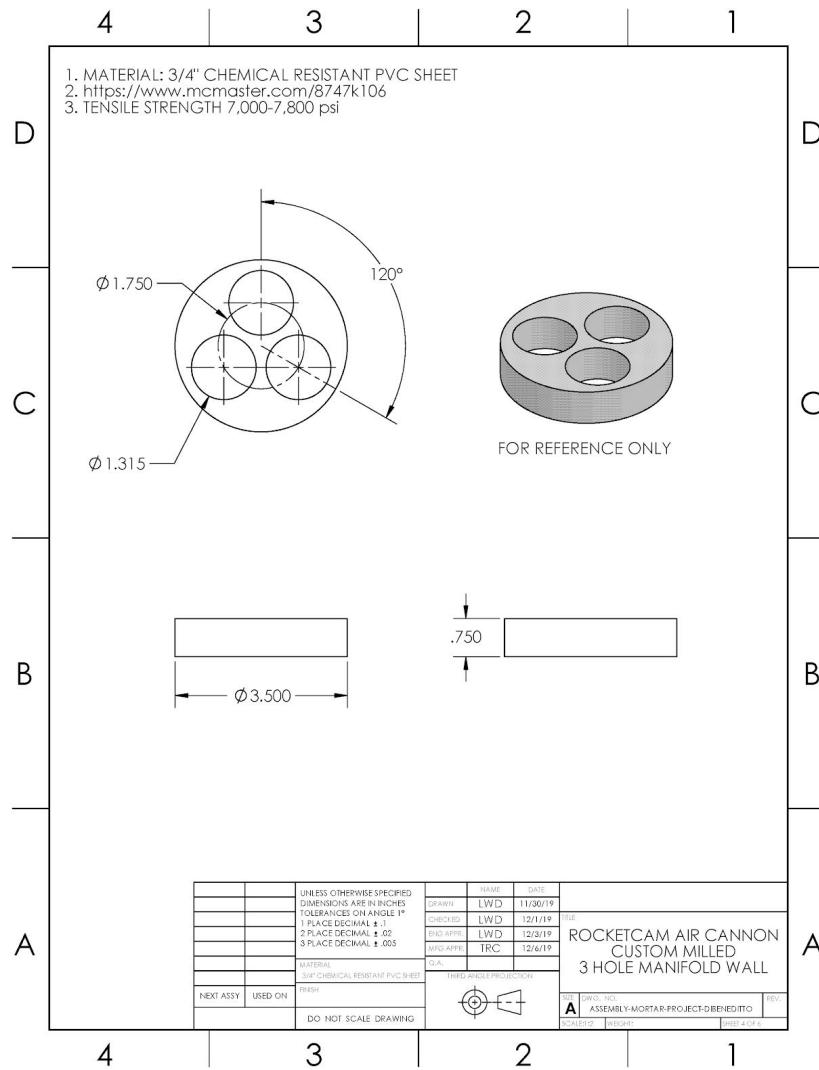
The physical product: Machined 3/4" Chemical Resistant PVC Sheet from McMaster-Carr and CAD Drawing to manufacture.
